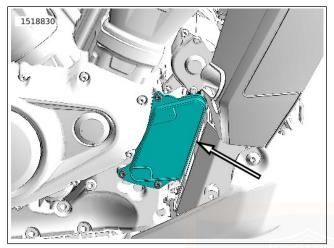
Oil Cooler Location (exhaust system removed for clarity)
